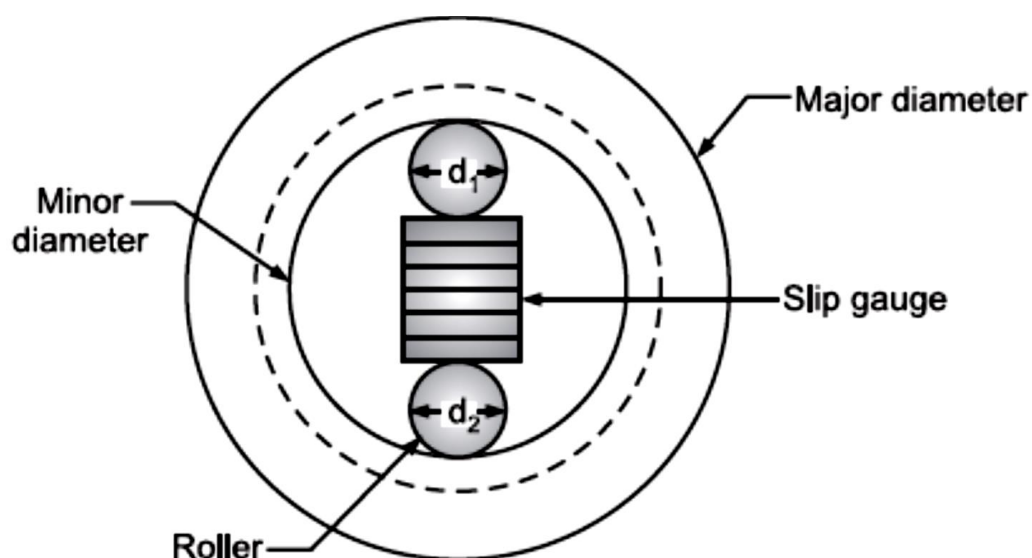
Internal diameter Measurement of screw thread with slip gauges and rollers
